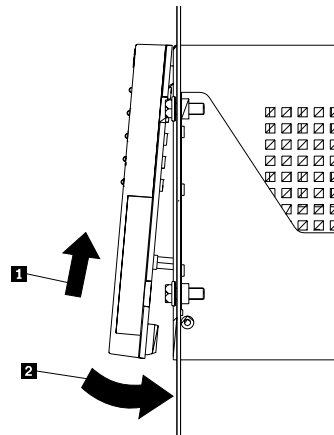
Replacing the controller-unit bezel (machine types 3526 and 3552)
